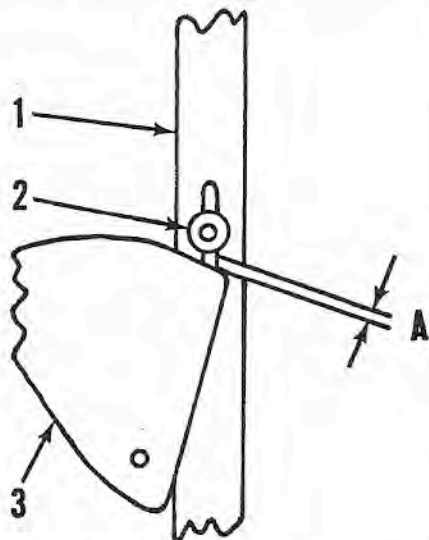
Schematic view of throttle control linkage. Refer to text for details of adjustment.
